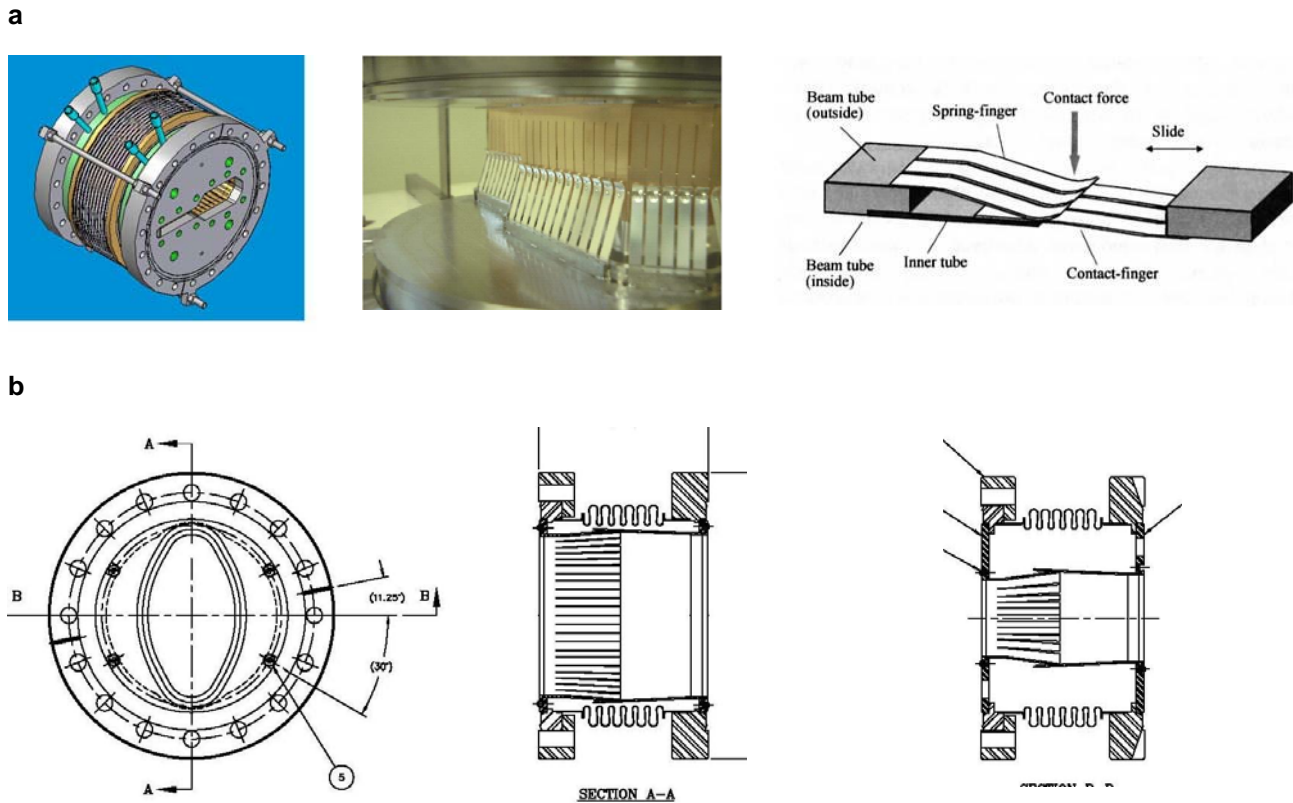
Two types of RF-shielded bellows: (a, upper row) the ones with welded bellows used in B-factories and BEPC-II with single or double fingers; and (b, lower row) the APS type with single fingers and hydro formed bellows.
